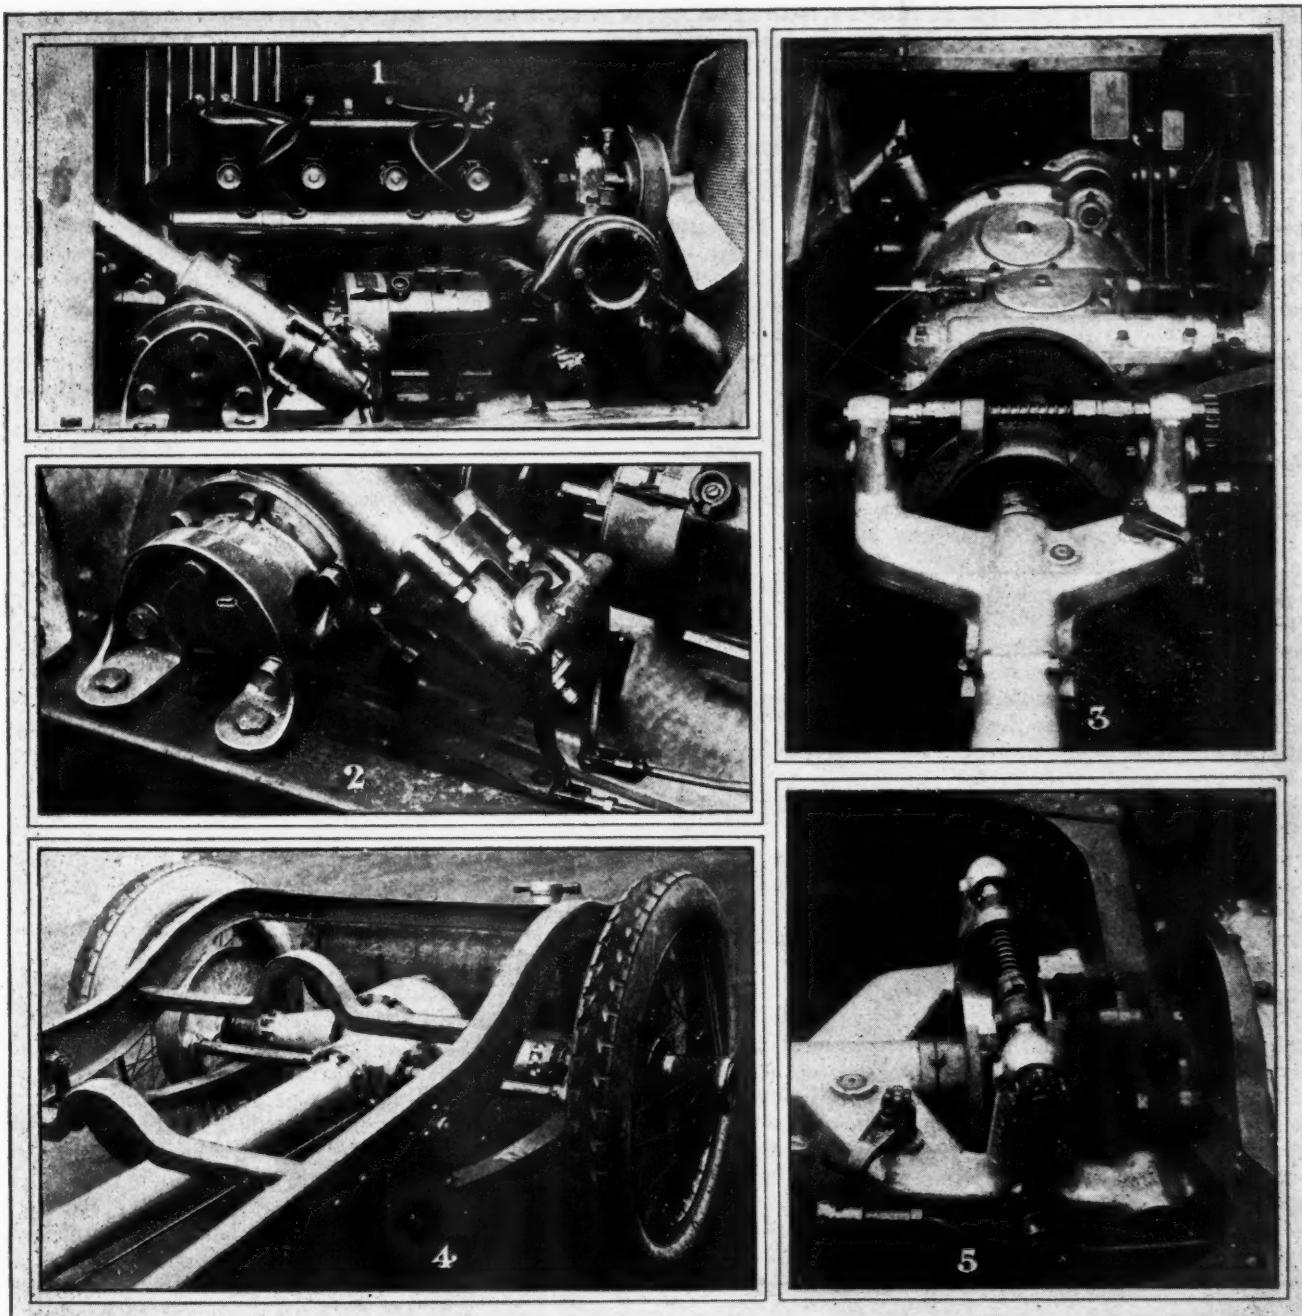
Right-hand side of Bignan Sport engine, showing water pump and electric generator. Fig. 2—The steering gear on the Bignan Sport can be adjusted to any angle. Fig. 3—Bignan Sport chassis, showing the forked arms of the torque tube, external brakes and gear box. The tire pump is inside the gear box. Fig. 4—Bignan Sport rear axle. The complete absence of brake levers will be noticed. Fig. 5—Forked arms of the torque tube, showing the external brake
